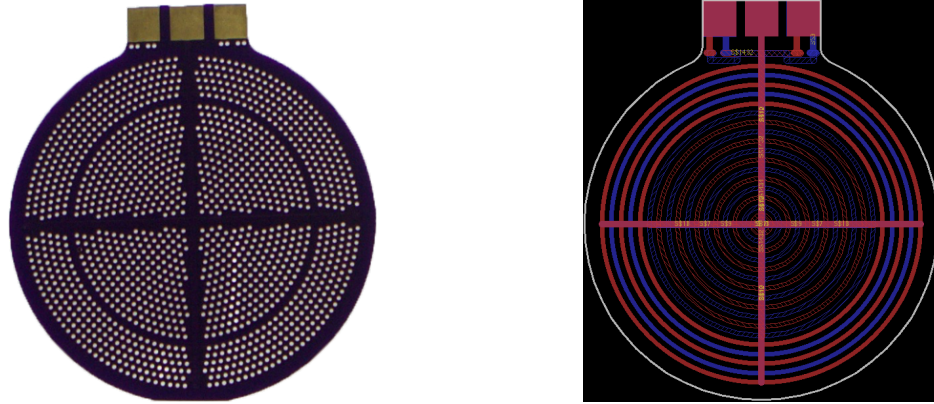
Image and electrical schematic of PCB electrode array. (left) PCB electrode array without corrosion coating. (right) EAGLE CAD schematic of electrical routes of inner anode (red cross-hatch), inner cathode (blue cross hatch) outer anode (solid red), outer cathode (solid blue).
